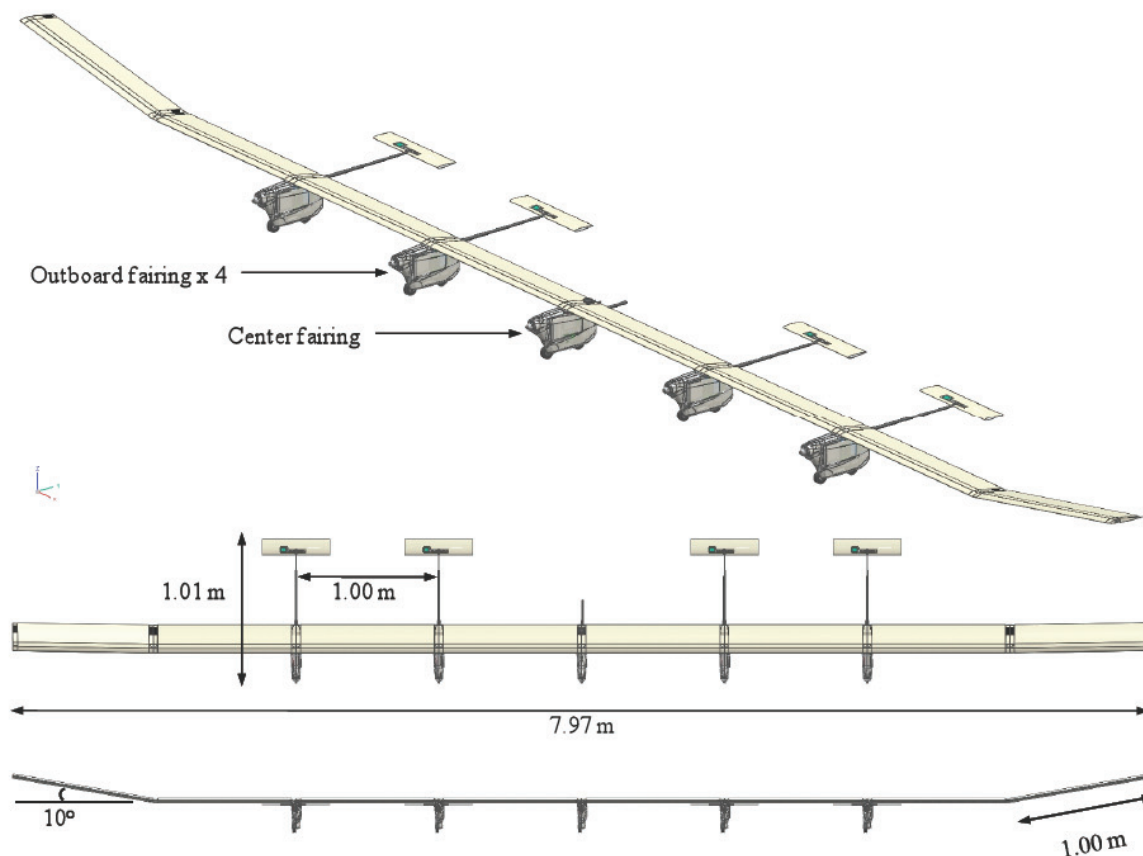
Complete X-HALE CAD assembly: isometric, top, and front views
